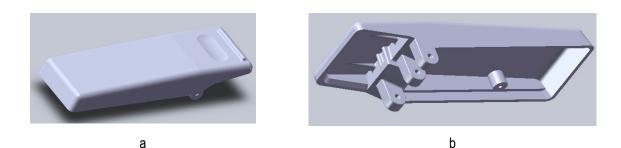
3D-model of remote sensor enclosure: a - top, b - bottom
